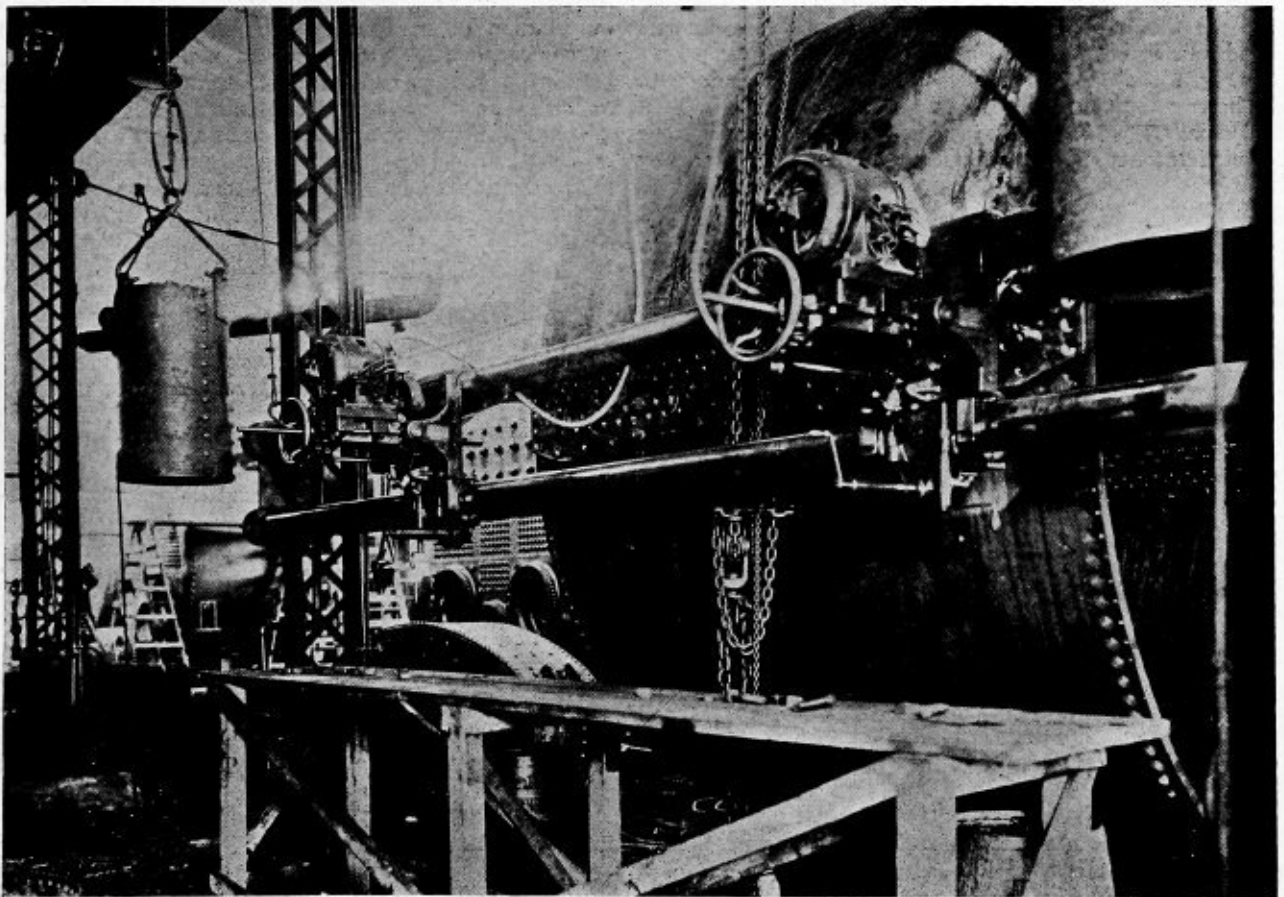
Dalley Drills Arranged to Drill Shell, Butt Straps and Heads in Position
